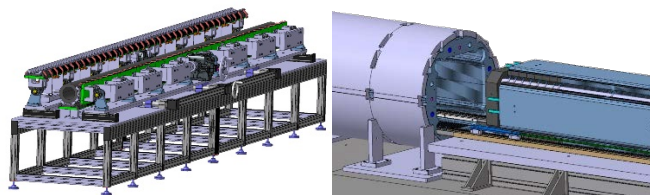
3d-design of the coil pack assembly bench (left) and a view of the interface of the coil-pack insertion tool into the yoke-shell assembly (right).
